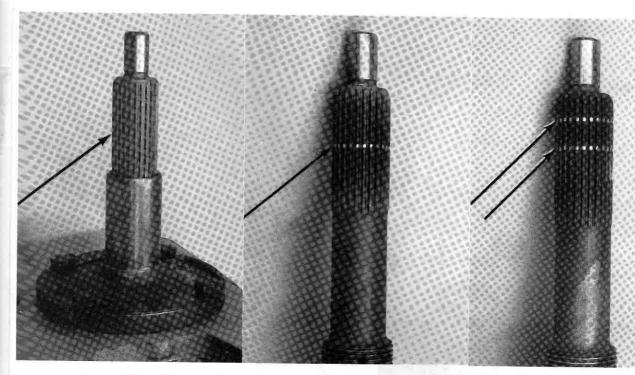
Illustrated transmission identifying the circumferential grooves on input shaft.
